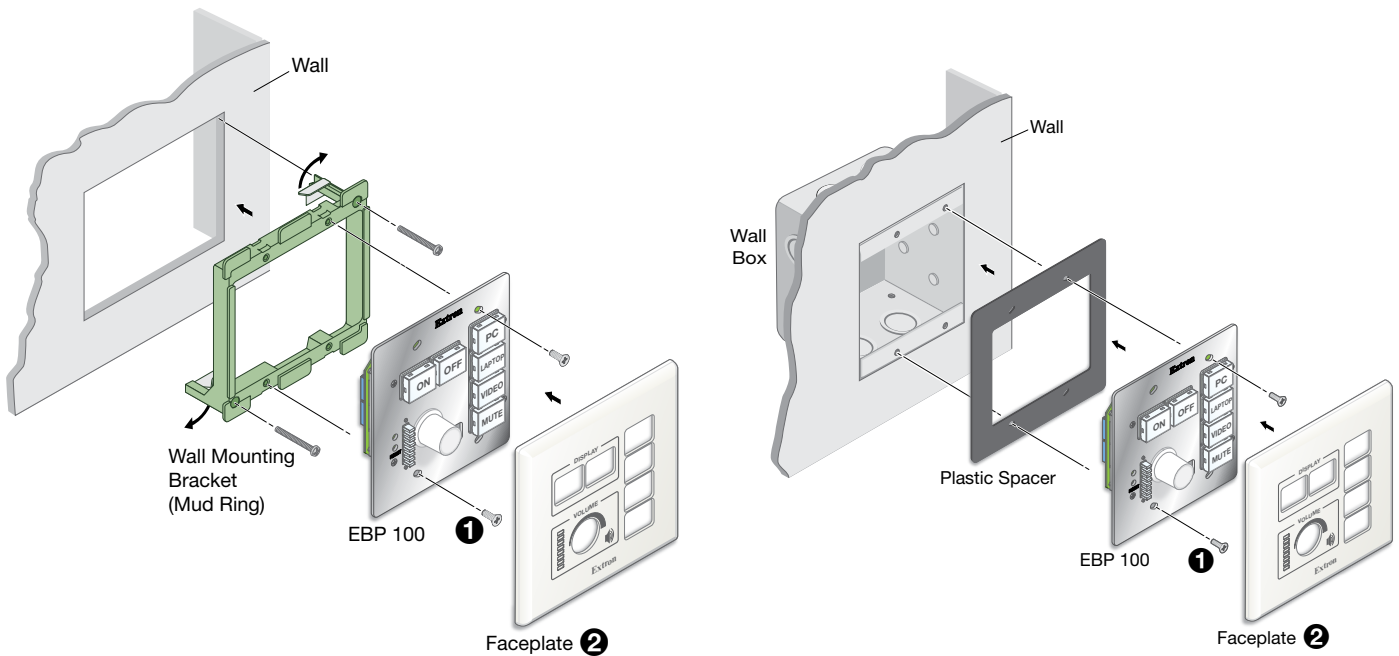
Mounting the EBP 100 with a Wall Mounting Bracket (left) or a Wall Box (right)
